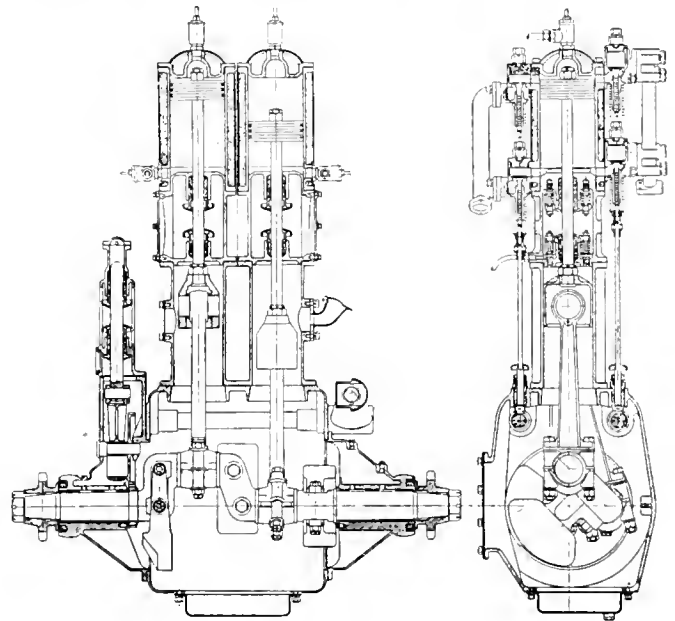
Side and End Sectional Elevations of Enclosed Engine of "Sentinel" Locomotive
